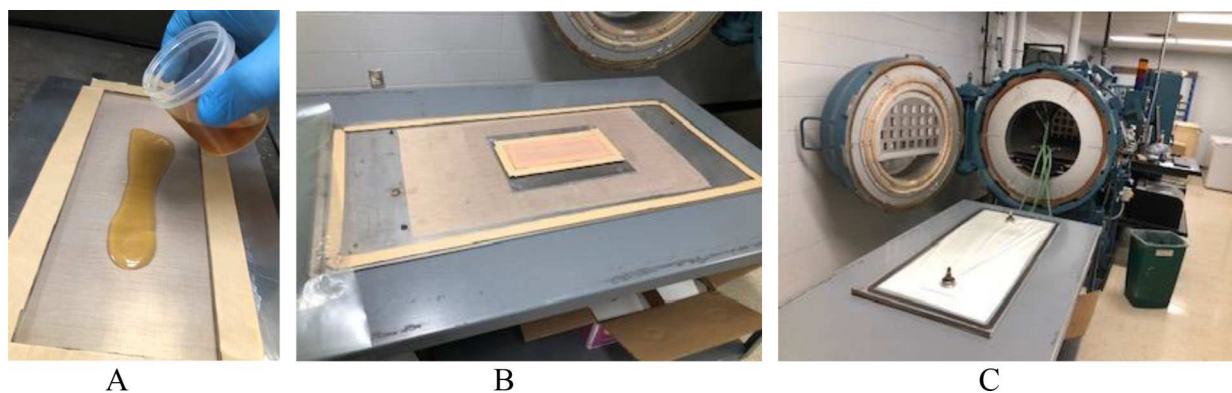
(A) Pouring resin into the mold, (B) Mold assembly on autoclave base plate, (C) Vacuum bag assembly prior to curing.
